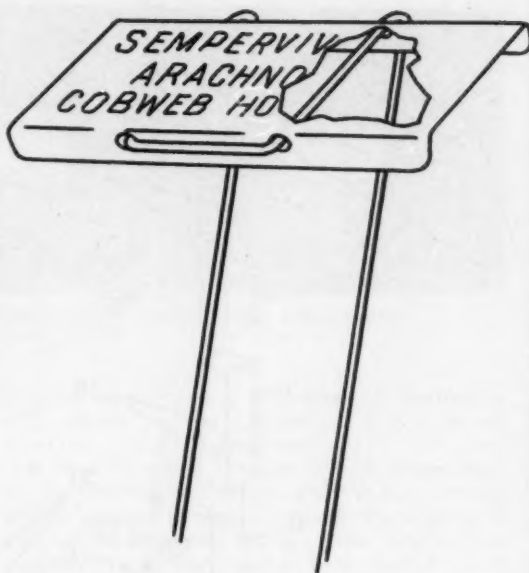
Design of all-stainless steel standard label for potted plants, etc., with label tilted away from plant (for modification with label tilted toward plant, see Fig. 30).—Drawing Courtesy of H. L. Yoh Company, Inc., Philadelphia, Pa.
